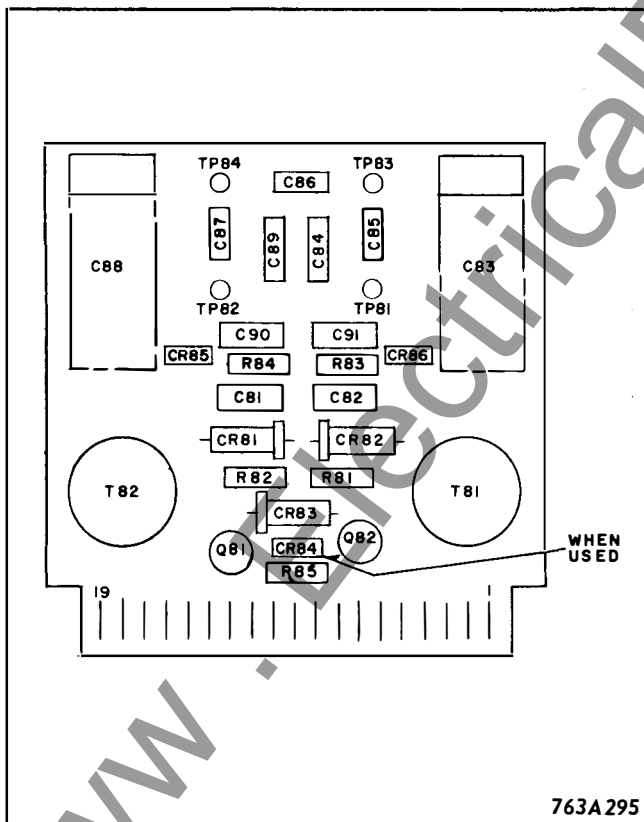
Component locations on Discriminator Printed Circuit Board.
